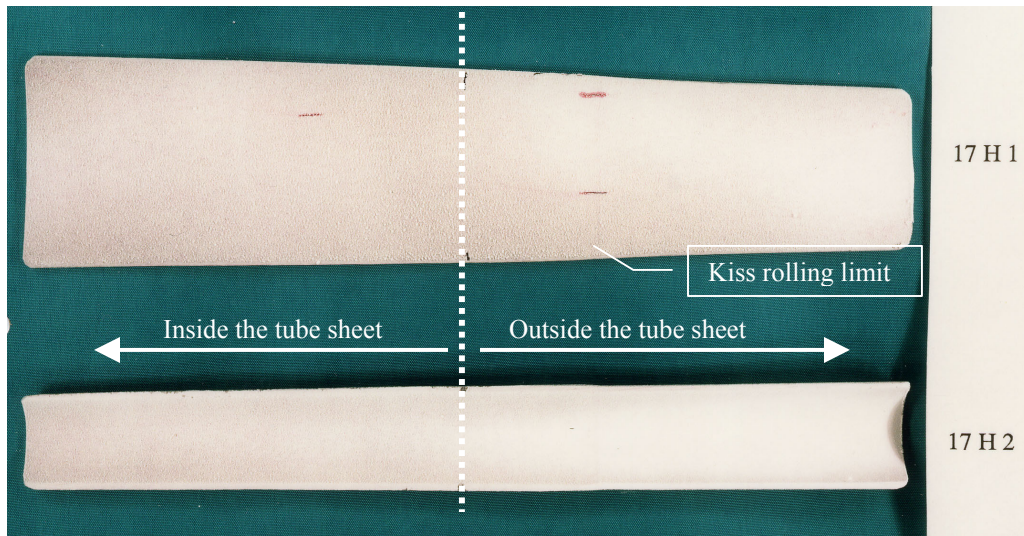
Liquid dye penetrant test on mock-up 17H. View of the two half tubes after test showing the detected cracks.
